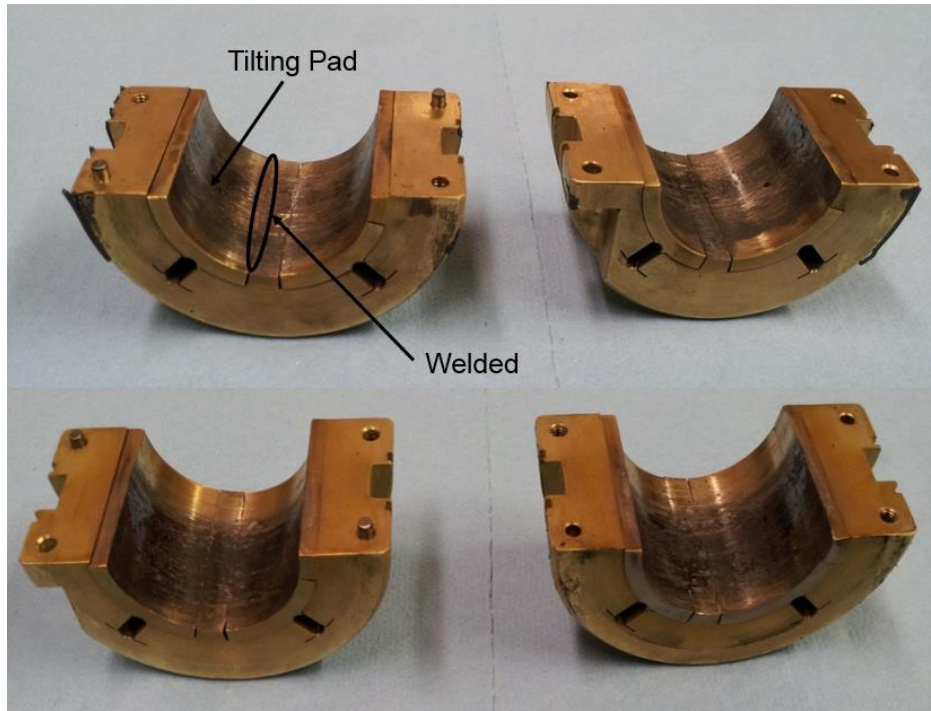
Photograph of air lubricated journal bearings after failure (2013) [10].
